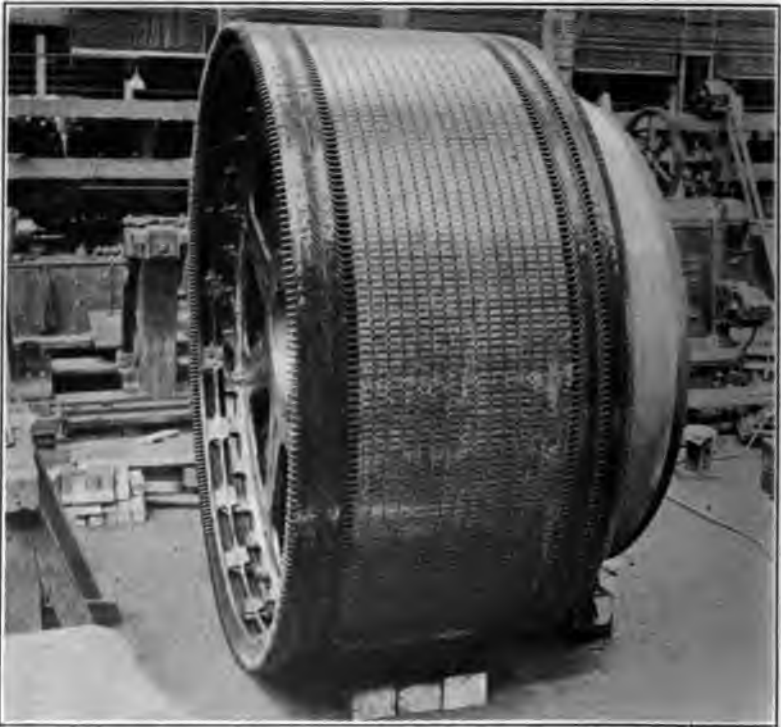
Complete armature and commutator for one end of Westinghouse reversing mill motor shown in Fig. 487.
